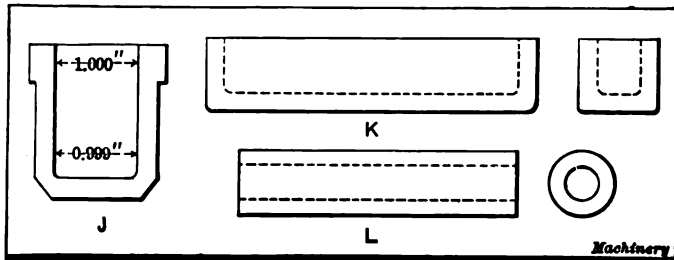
Castings which illustrate Points of Shrinkage and Draft
